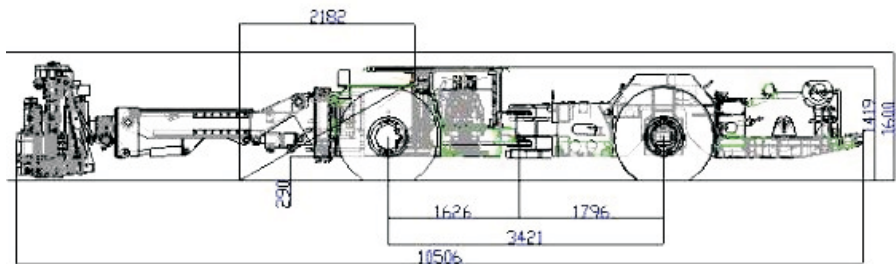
Basic dimensions of the roof bolter Roof Master 1.4 Automatic
